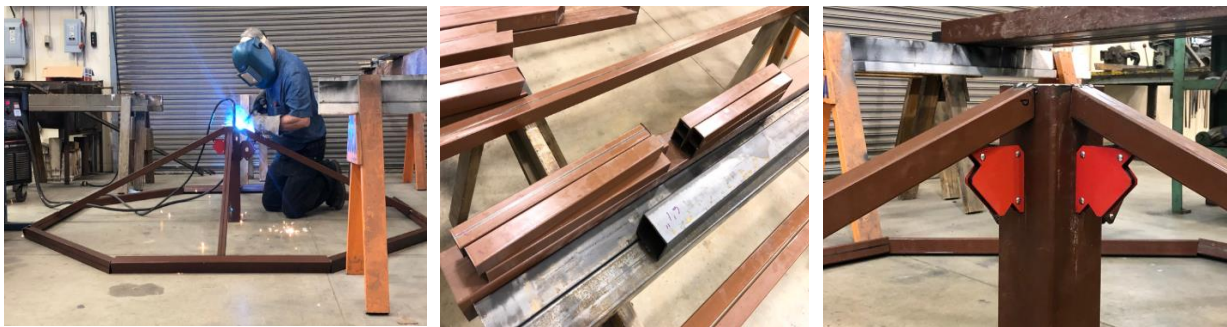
Metal works, cutting and welding of the solar PV charging stations in the production labs
